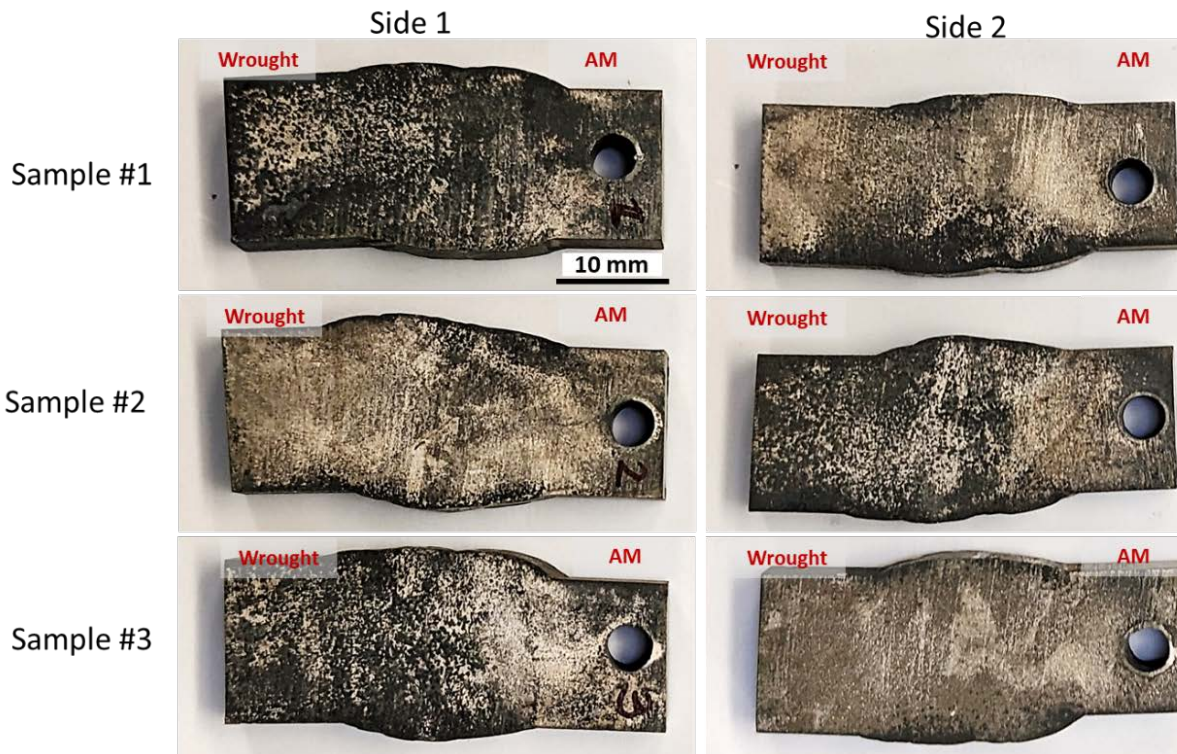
Appearance of post-corrosion EBAM-to-wrought H282 weld coupons
